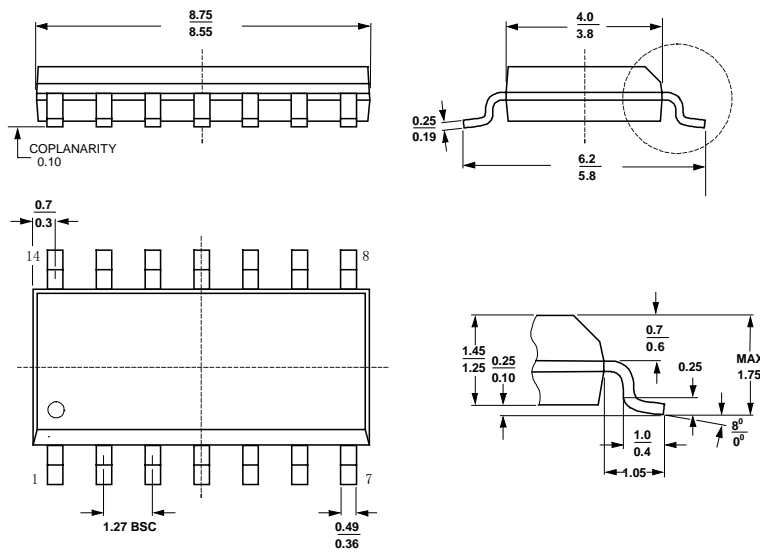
14-Lead SOIC Package Dimensions shown in millimeters
